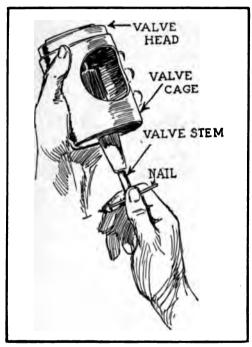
A Nail or Piece of Wire Only Tool Necessary for Grinding Buick Valves to Correct Seating in Cage.
